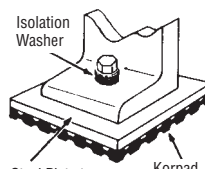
Korpad with load distributing steel plate. For use when machine leg is smaller than the area of Korpad required. Drawing shows optional bolt down arrangement. If bolt is not used, tack weld leg to plate.
